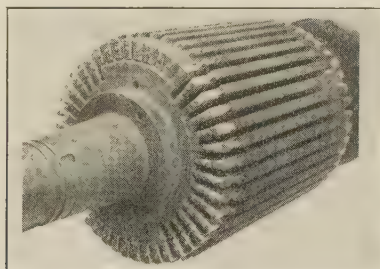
VIEW OF UNWOUND ROTOR OF TWO-POLE, 3600-REV. PER MIN. SYNCHRONOUS MOTOR, SHOWING CONSTRUCTION OF STARTING WINDING
